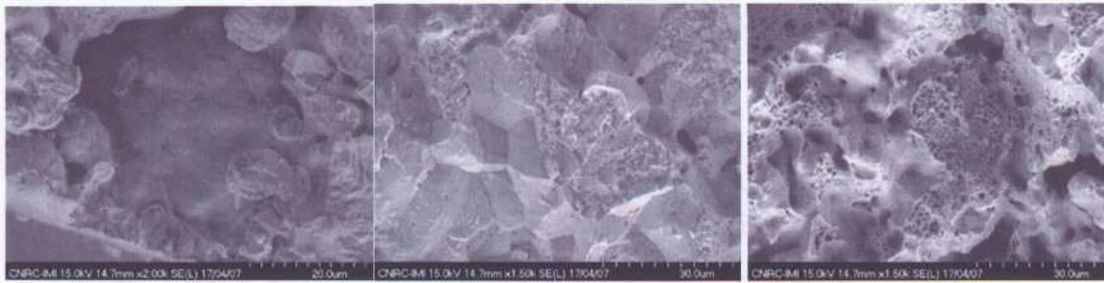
Fracture surfaces of STD Ni steel. Crack initiation at pore (left), intergranular cleavage in the case layer (middle) followed by ductile tearing in the core (right).
